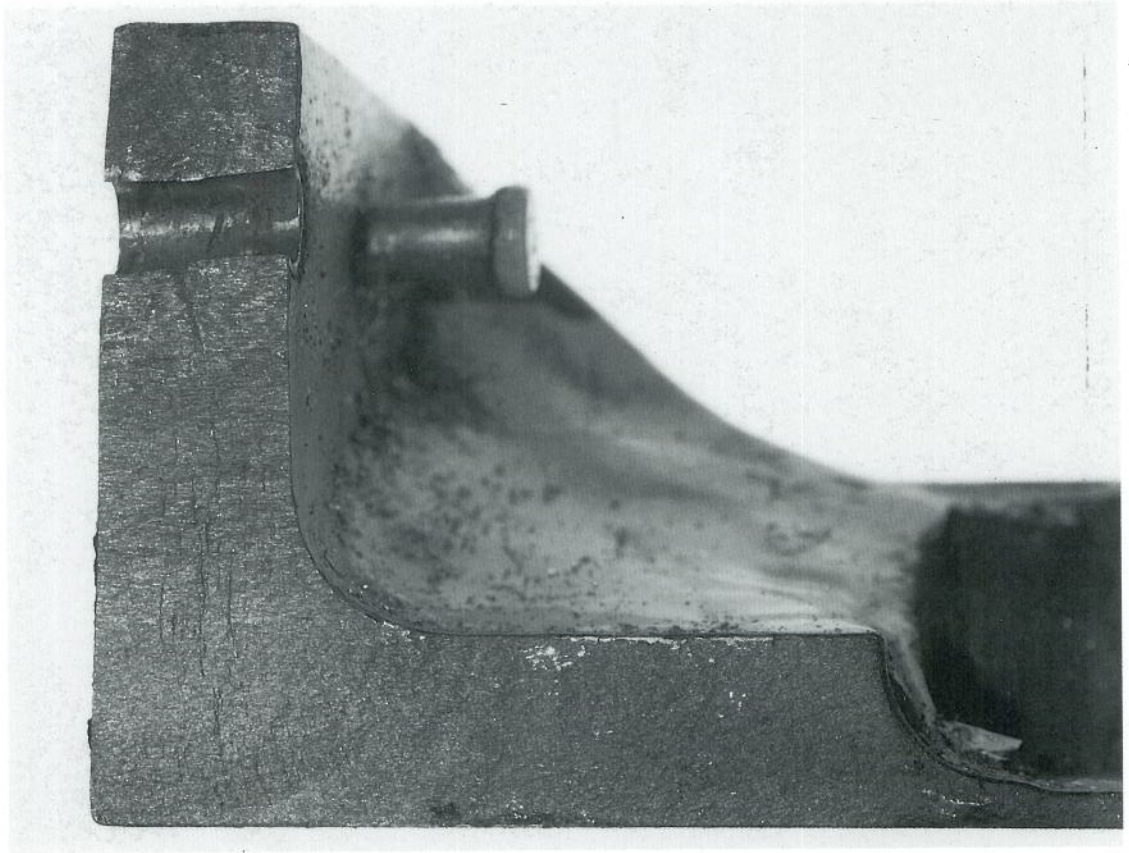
Details of banjo fitting and skin cracking on Bell 214ST G-BKFN
